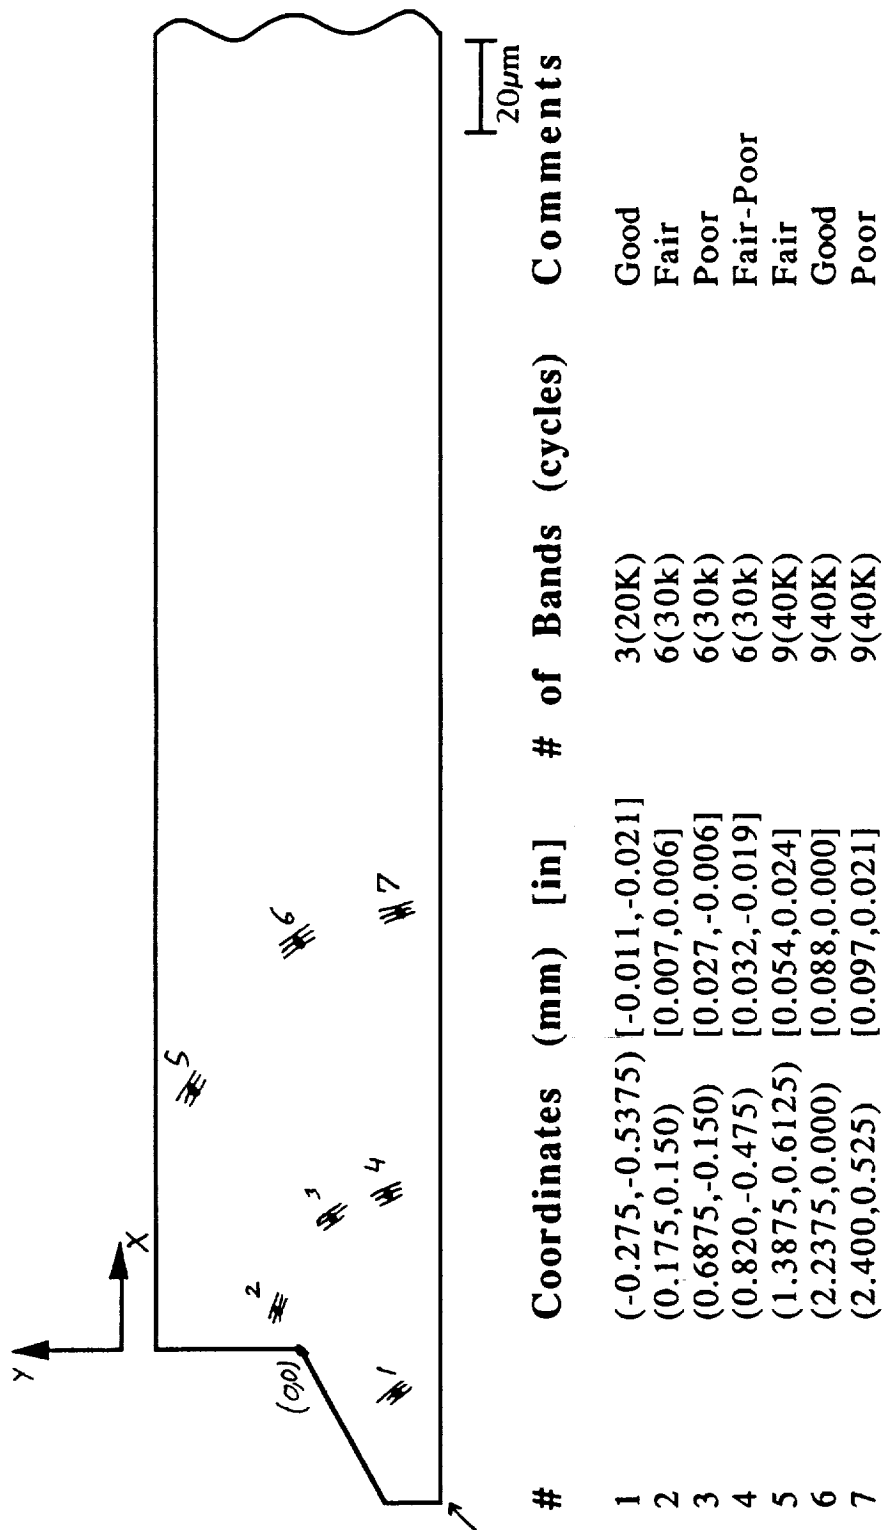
Rivet hole schematic: Upper rivet row, hole number 4J7, fatigue crack growth is in the forward direction.
